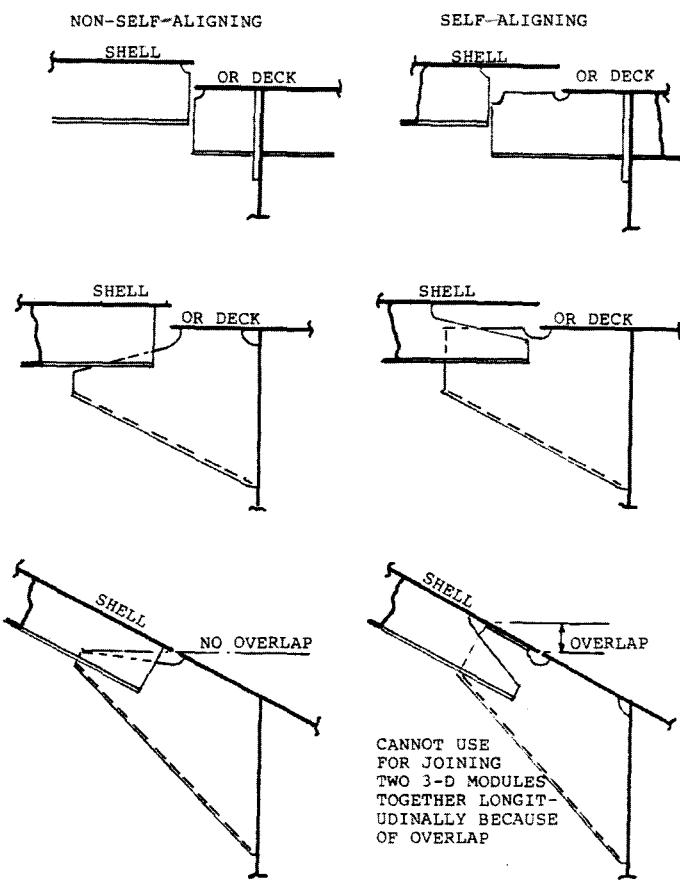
Shell Connect Alternatives in Way of Block Breaks
